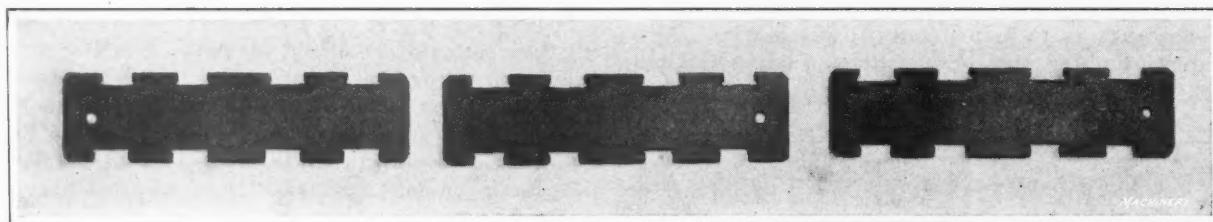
Snap Gages of the Old Type with too Many Gaging Notches in One Piece
